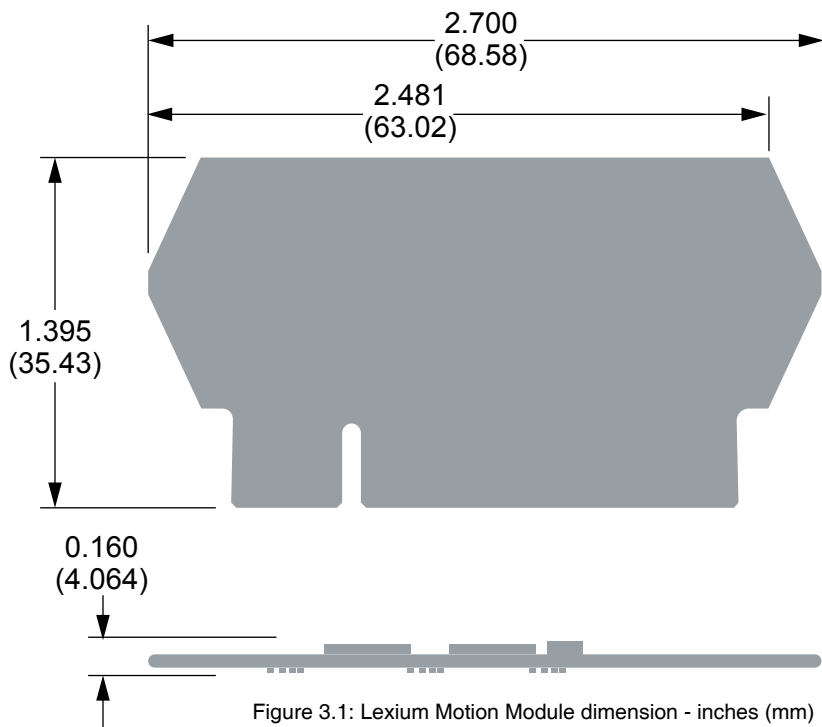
Lexium Motion Module dimension - inches (mm)
